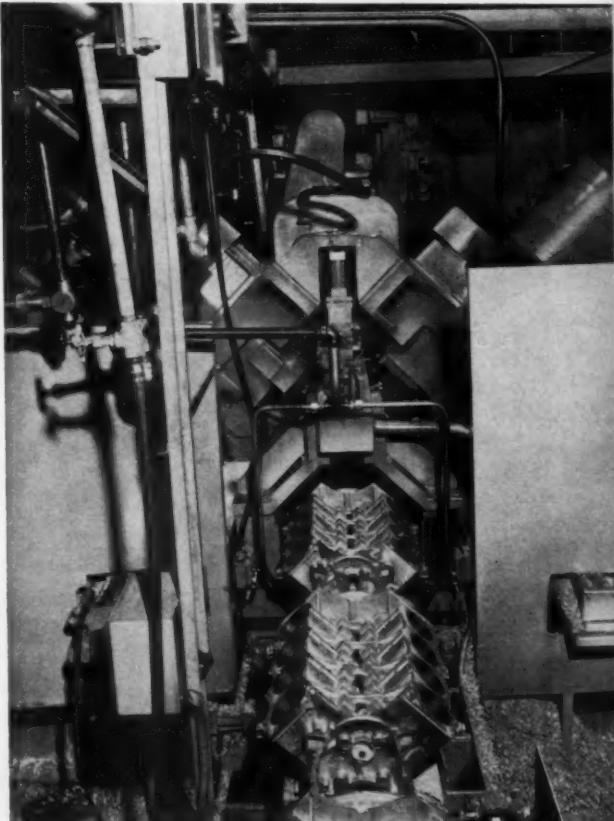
Aluminum crankcases have bank faces milled instead of broached.
